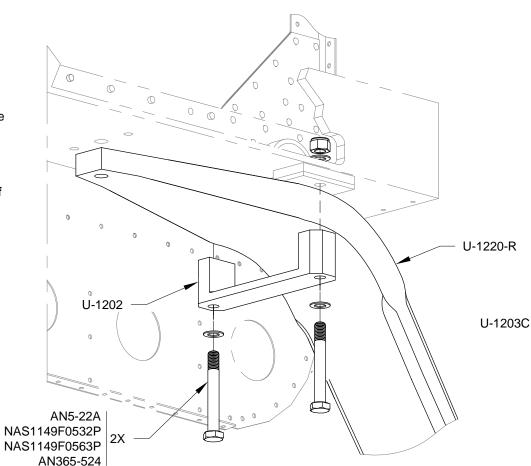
GEAR LEG ATTTACH OUTBOARD
